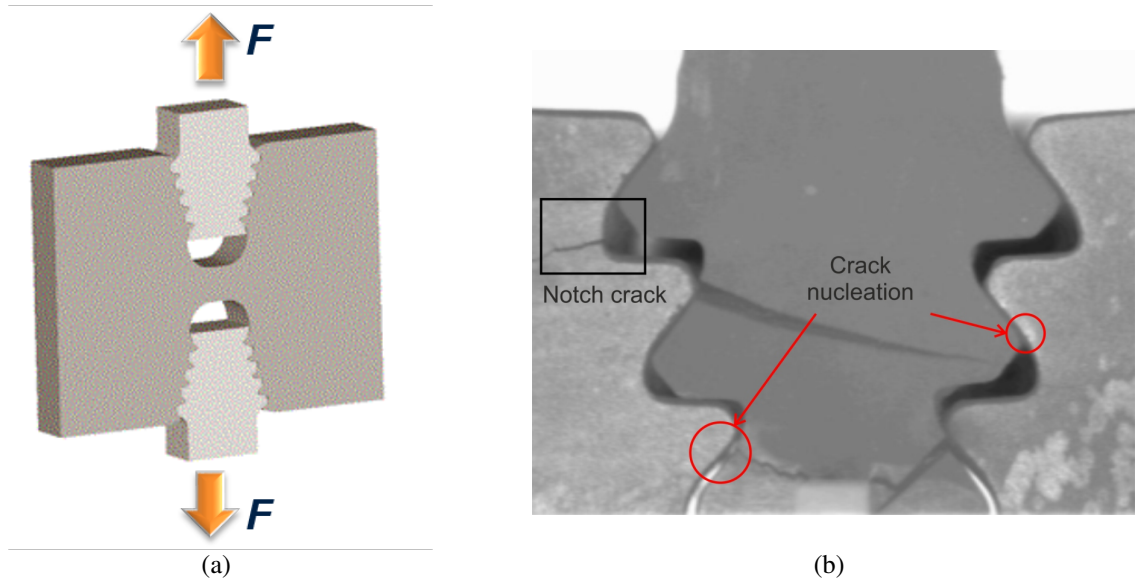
(a) Schematic representation of the H-Specimen test; (b) Cracks on a fir-tree blade to disc assembly.
